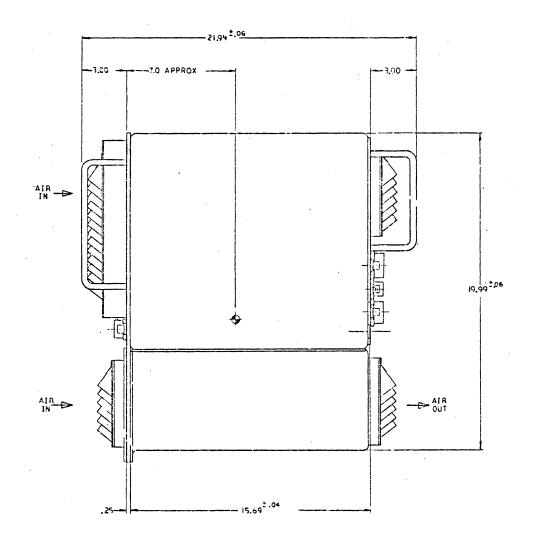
Outline and Installation Display Driver Assembly (Sheet 2 of 3)
